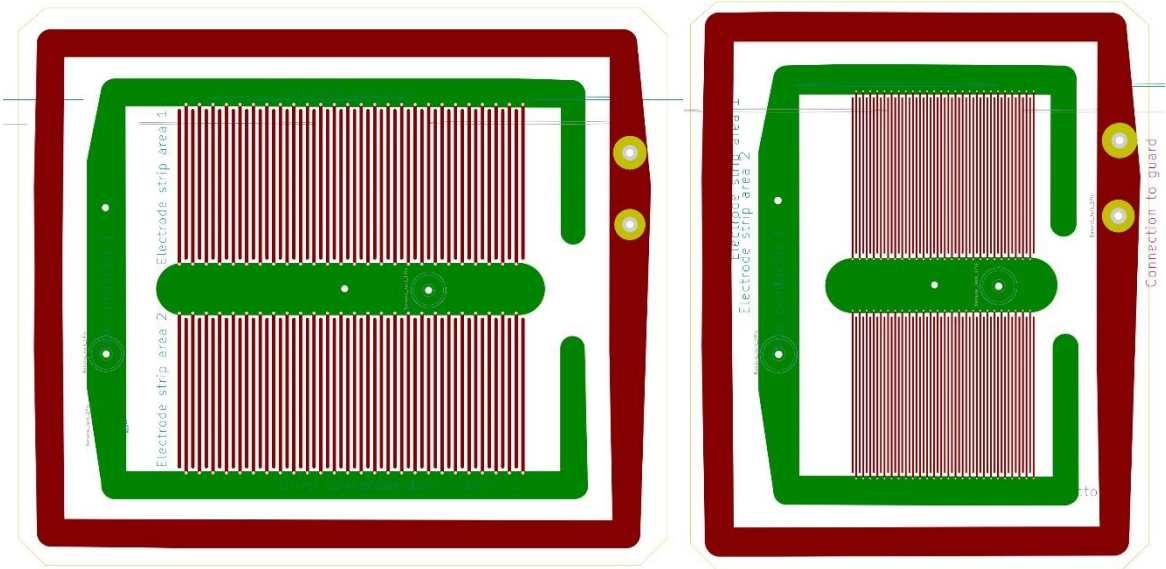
Front side view of the IDE 3 (left) and IDE 4 (right) prototypes by the ‘PCB layout editor’ with vias and pads, connecting the 2 outer layers on top (green coloured) and bottom (red coloured, the active sensing area) parts of the sensor.
